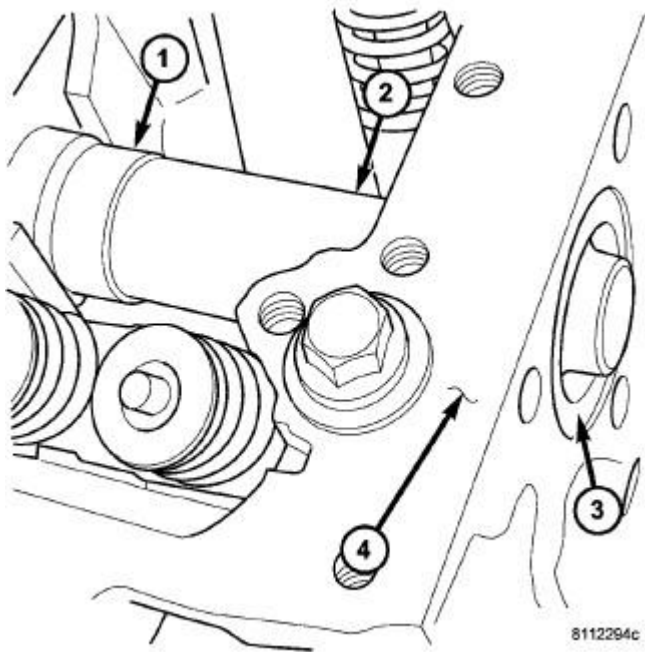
CAMSHAFT INSTALLATION - LEFT
